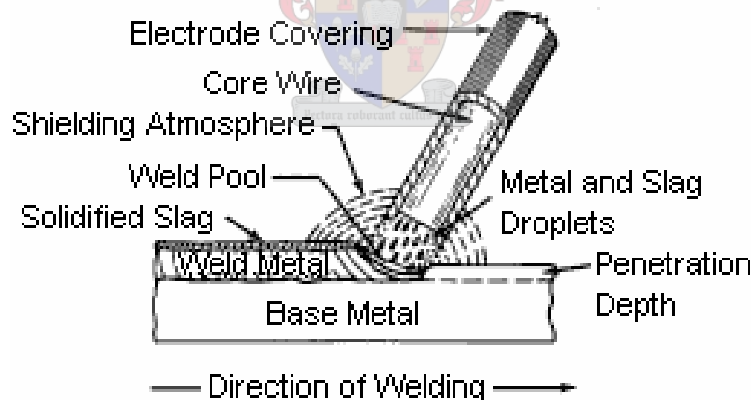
Shielded metal arc welding (SMAW)
